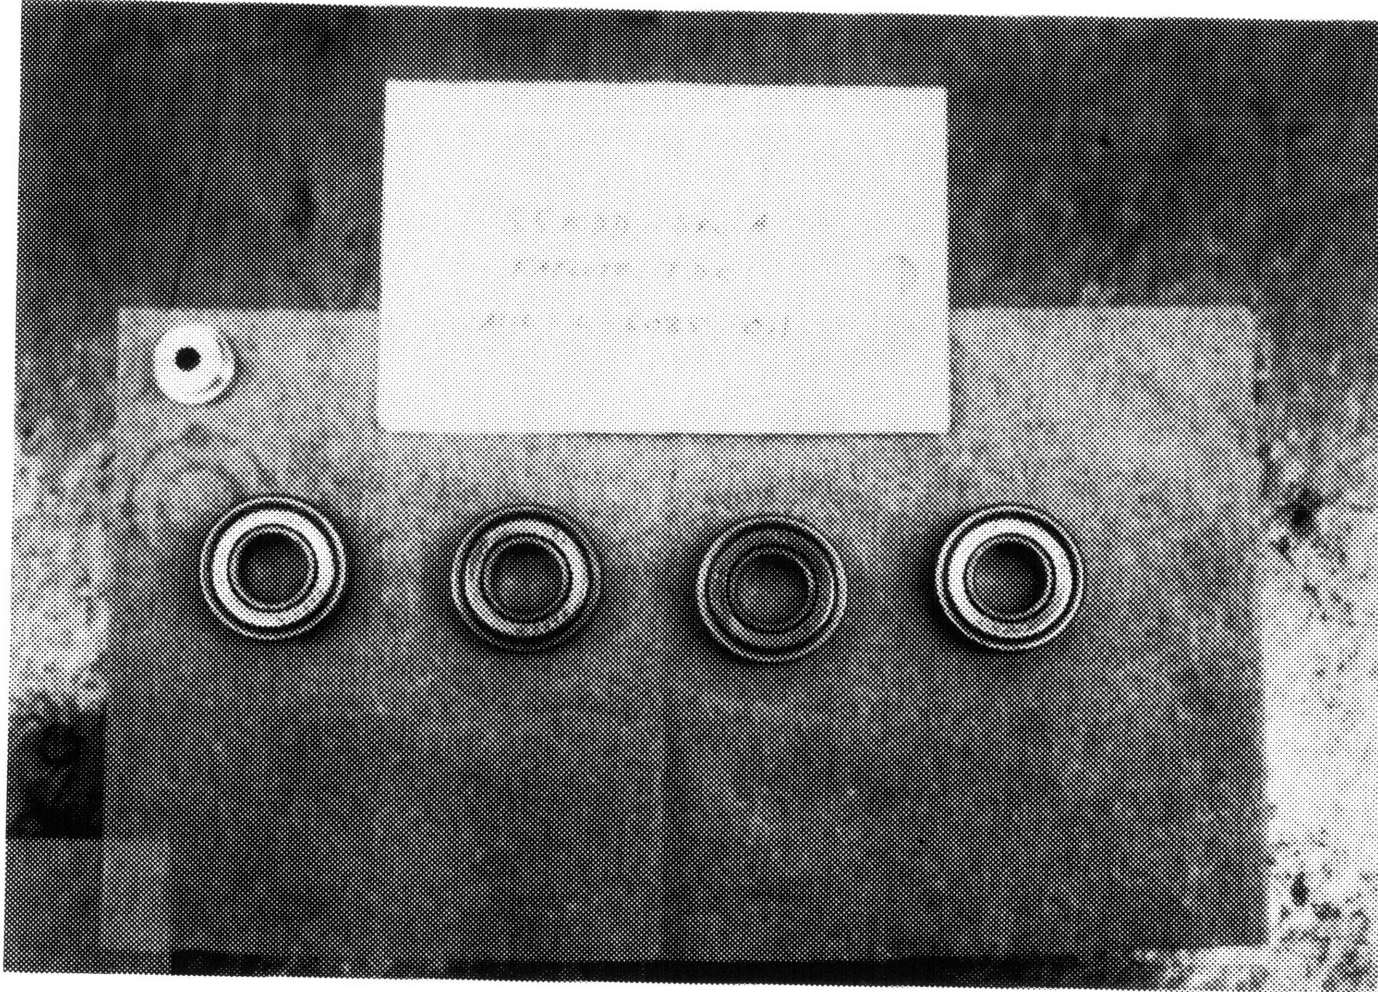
Fafnir "Fafcote" 1/2" bearings lubricated with MIL-L-6085 oil
